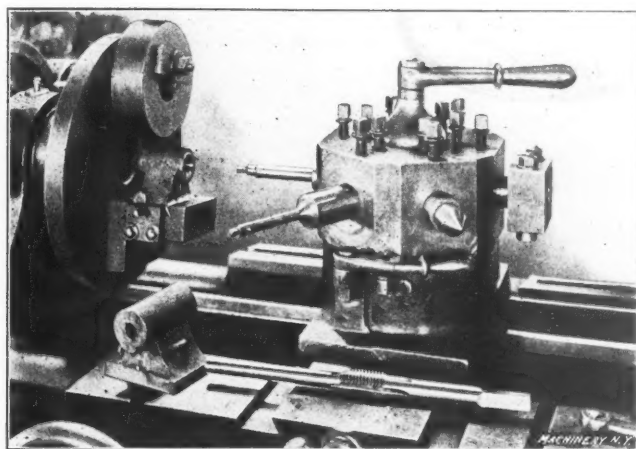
Fixture and Tools used for Drilling, Boring and Tapping Apron Half-nuts
